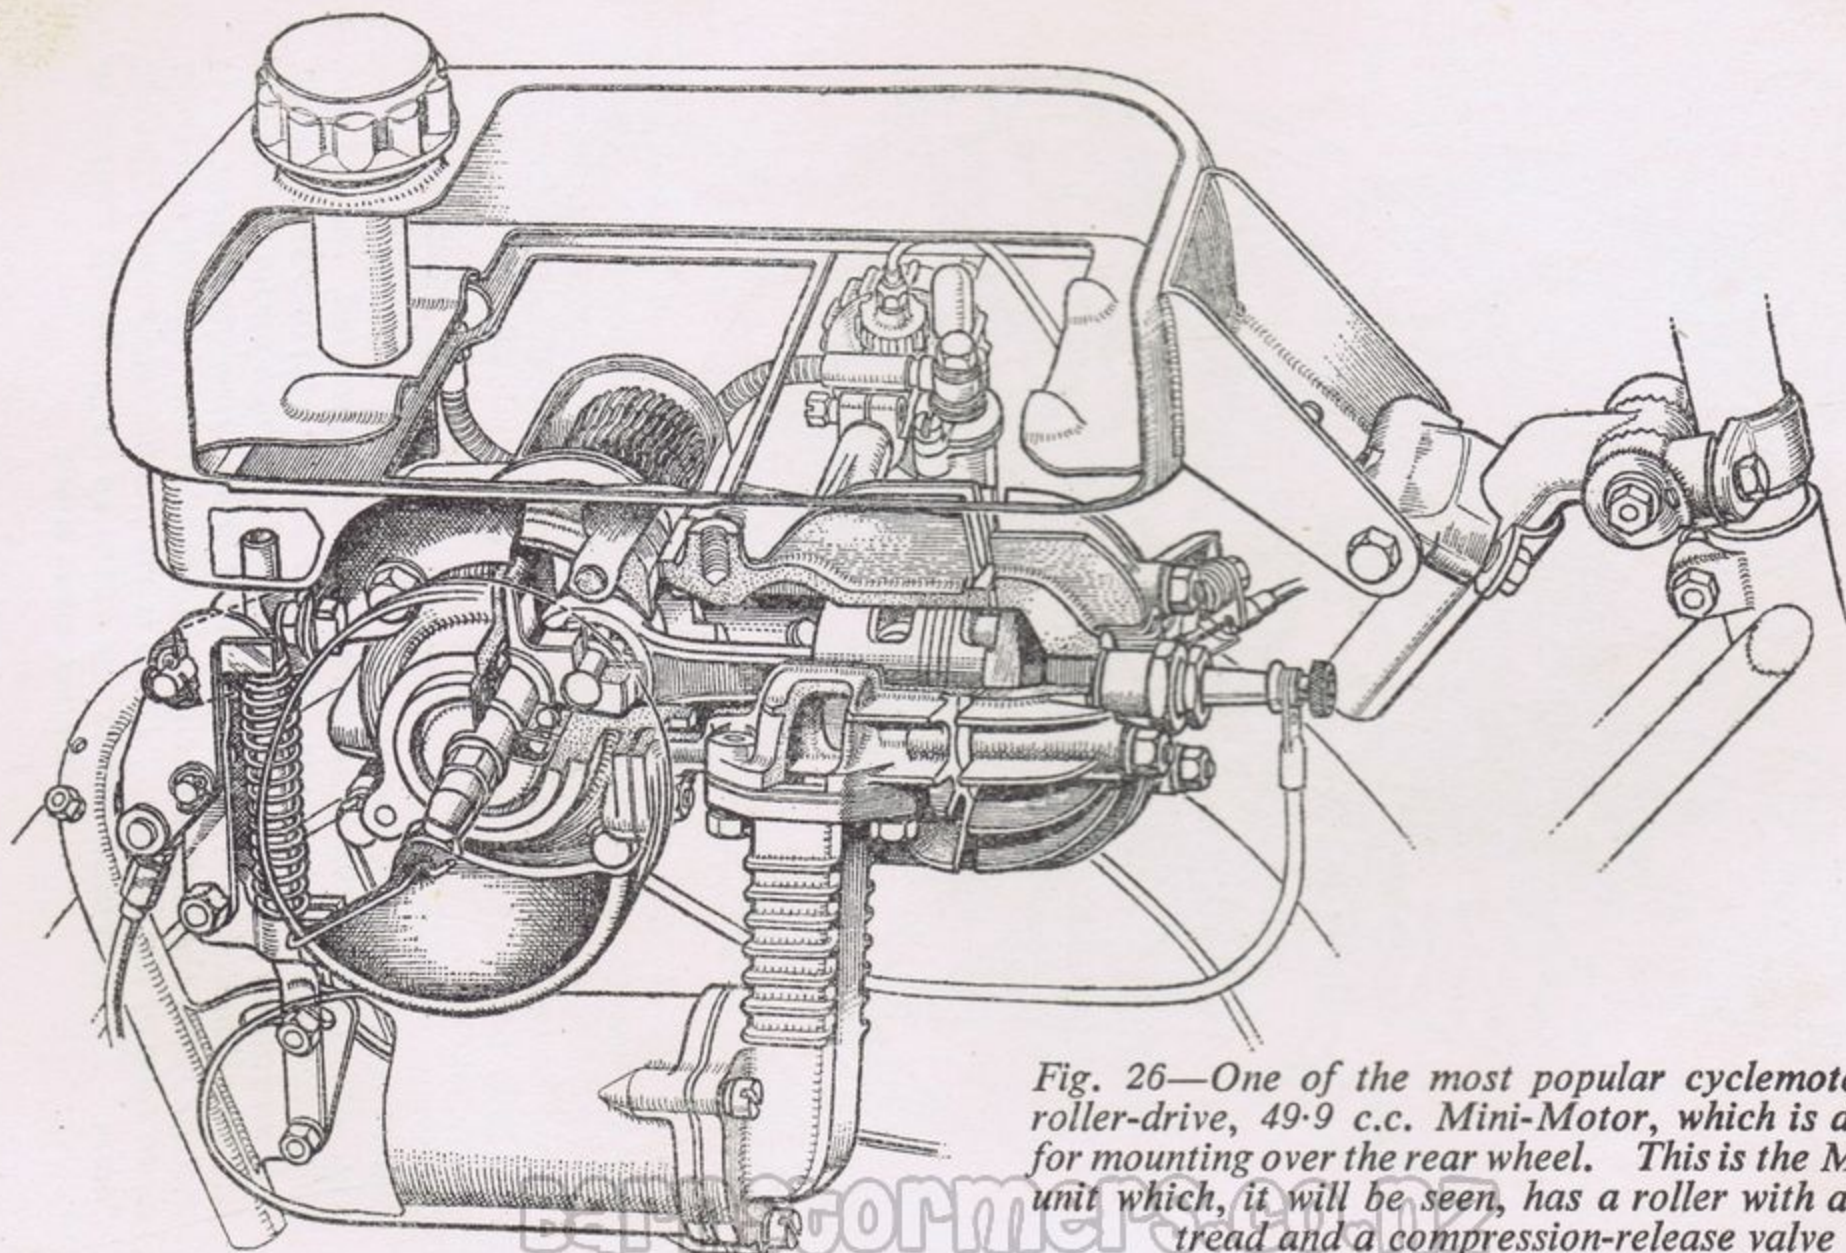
One of the most popular cyclemotors, the roller-drive, 49.9 c.c. Mini-Motor, which is designed for mounting over the rear wheel. This is the Mark III unit which, it will be seen, has a roller with a special tread and a compression-release valve
